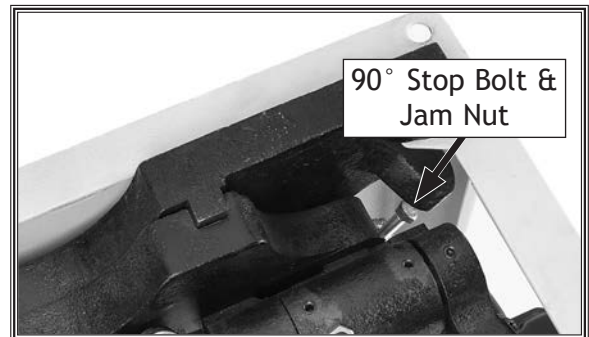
90° stop bolt and jam nut (table removed for clarity).
